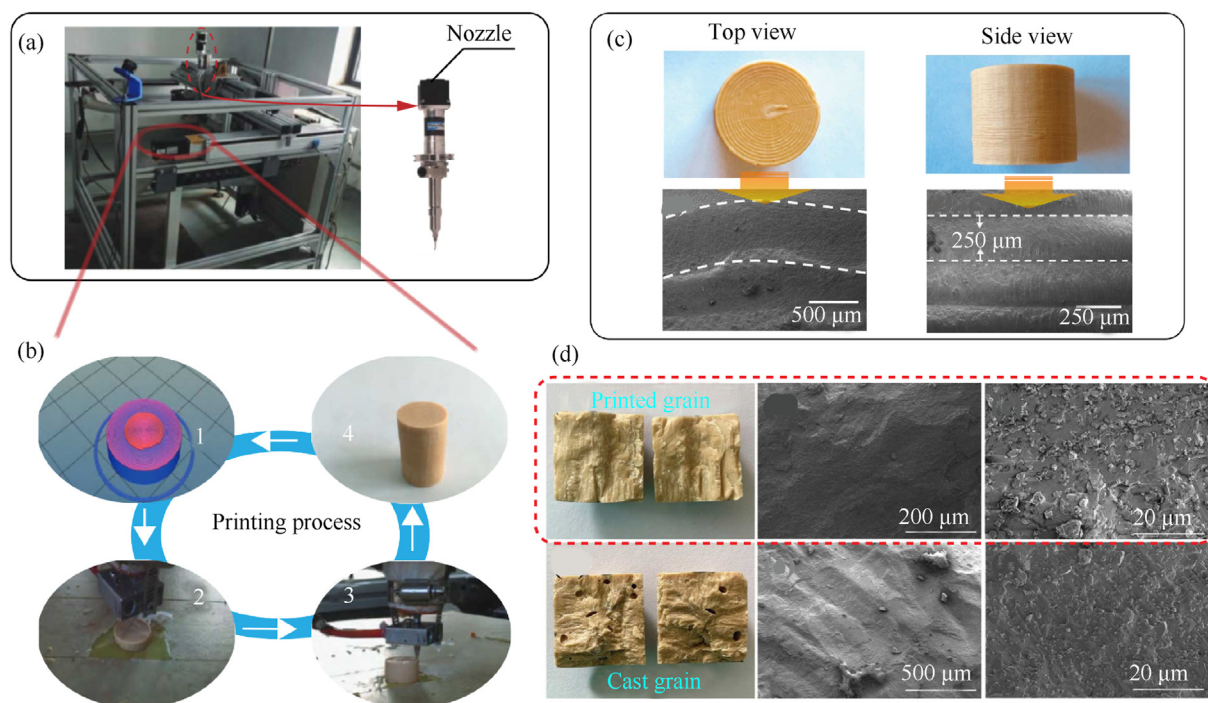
(a) The FDM printer made by Xiao et al.; (b) The printing process of TNT/nano HMX melt-cast explosive grain; (c) The top and side views of printed samples; (d) Microstructure of fracture surfaces of printed and traditional explosive samples. Adapted from Refs. [99,100].
